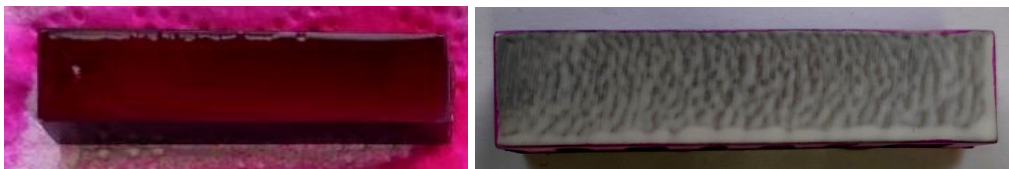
The appearance of the samples after the application of the chemical penetrants (left) and after their removal (right), sample 1
